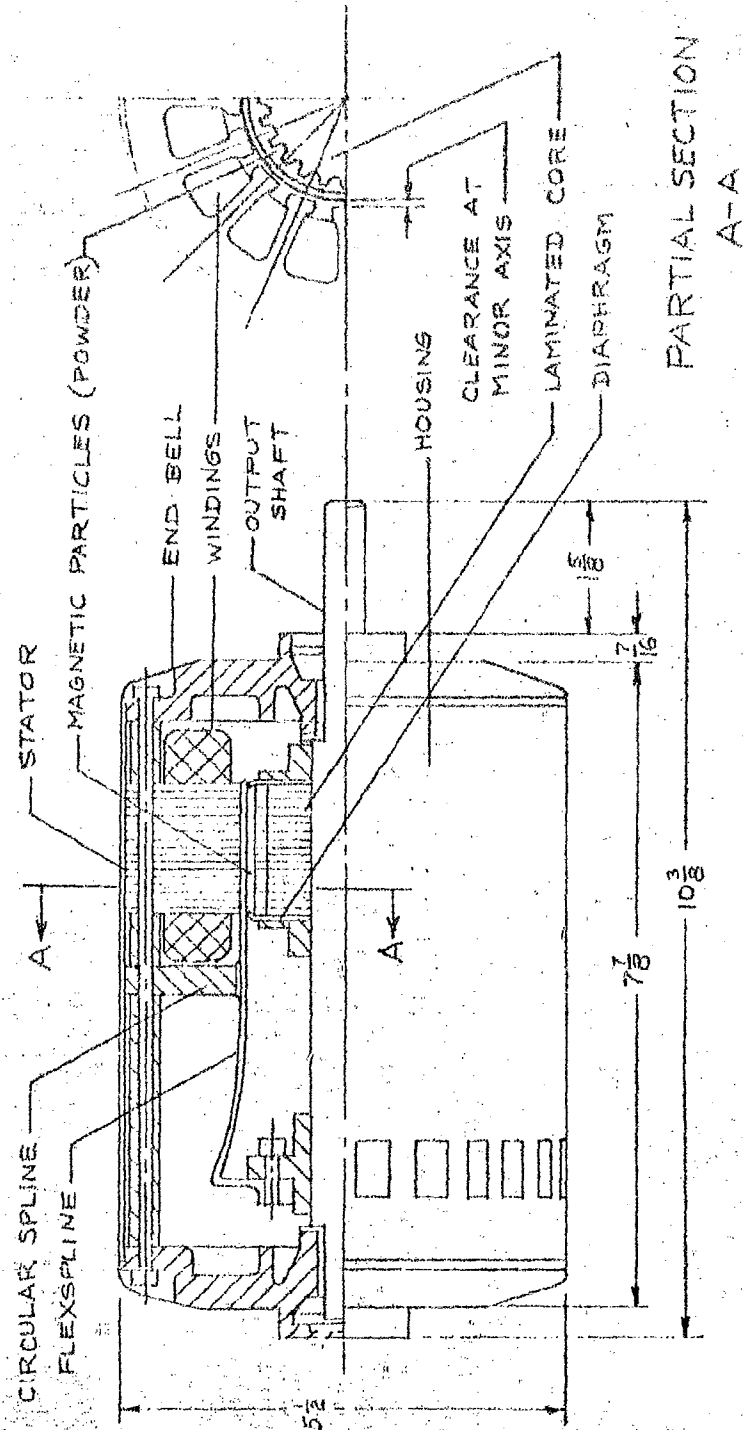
MODEL EHD-2 SECTIONAL DRAWING
